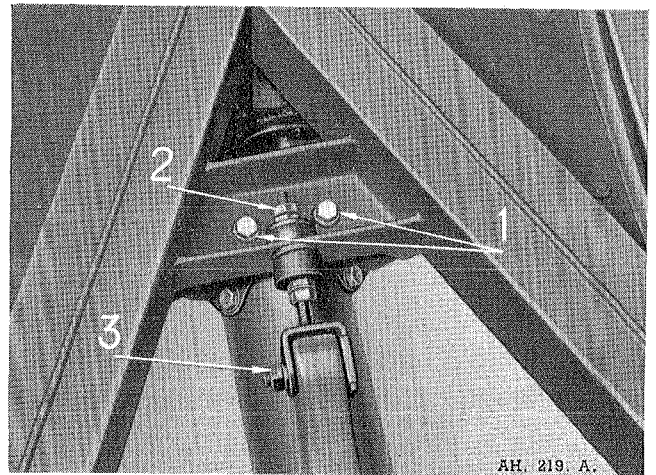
The gearbox lower securing points showing 1, Setpins; 2, Stabiliser Adjusting Nut; 3, Securing Pin.
